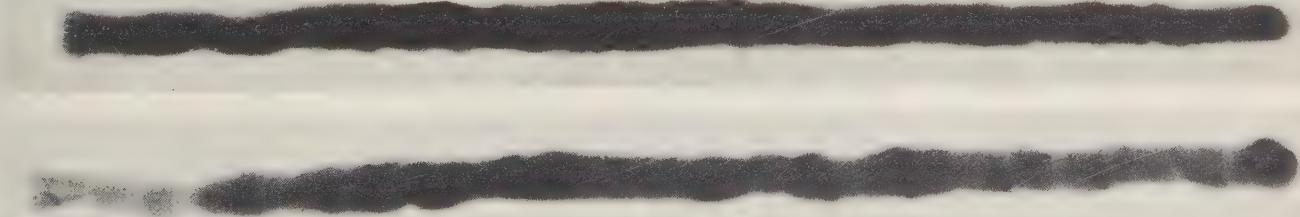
(Top) X-ray of weld made using the helium-nitrogen gas mixture shows a freedom from gas pockets, heat cracks, and other welding defects. (Bottom) X-ray of weld made using the helium-argon mixture indicates the presence of heat cracks at the beginning and end of welds with scattered gas pockets throughout the welds.
